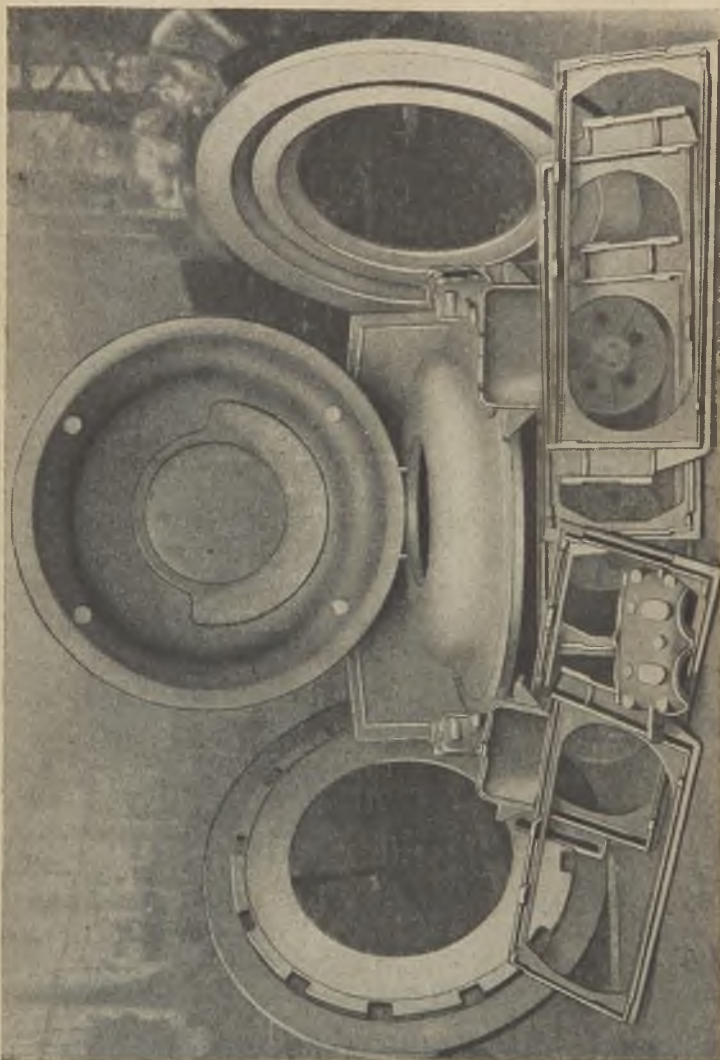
GROUP OF END-PLATES AND SWITCH GEAR CASTINGS IN NON-MAGNETIC IRON.
